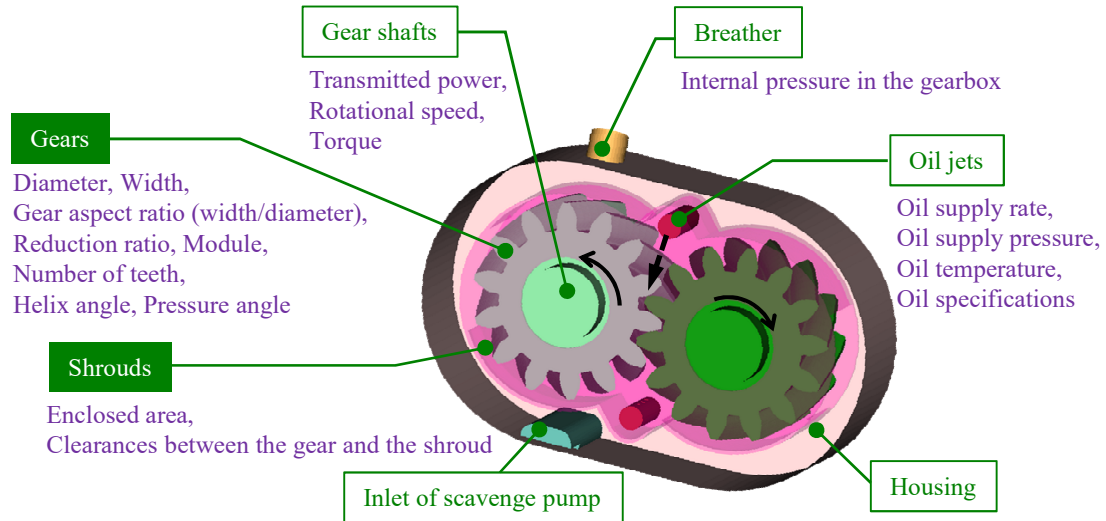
Schematic configuration and typical design parameters in a gearbox
